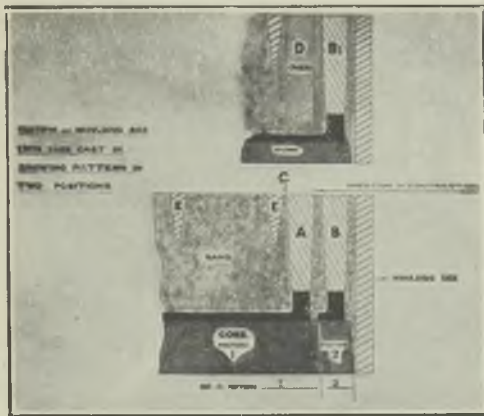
SECTION THROUGH MOULDING BOX SHOWN IN FIG. 4.
